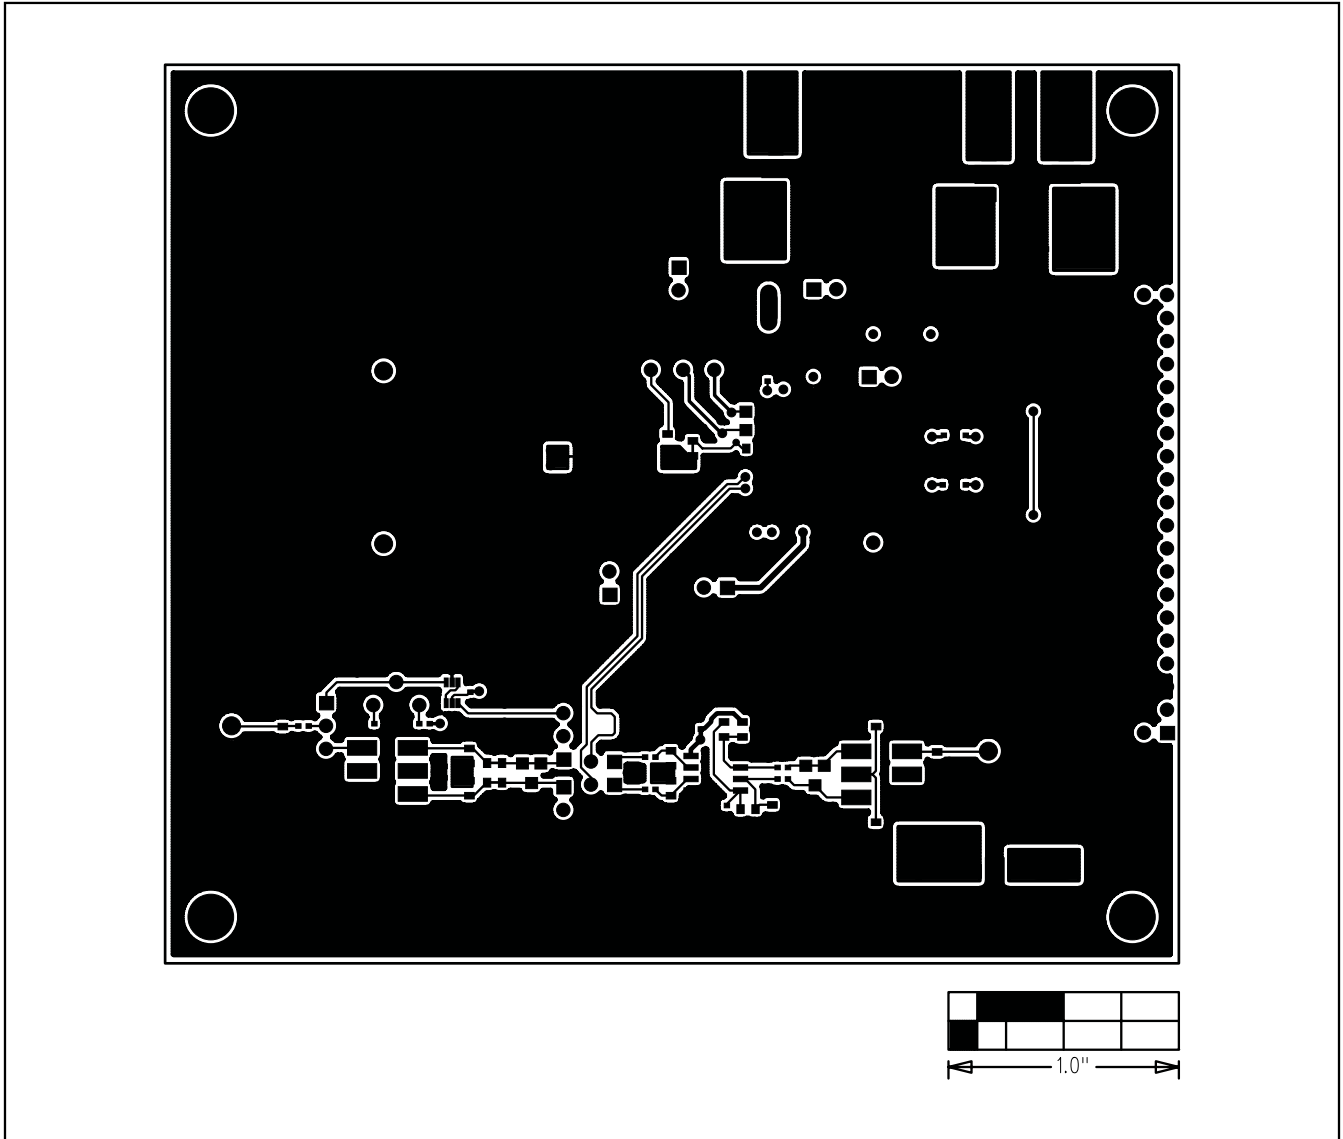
MAX12553/MAX12554/MAX12555 EV Kits PCB Layout—Solder Side
